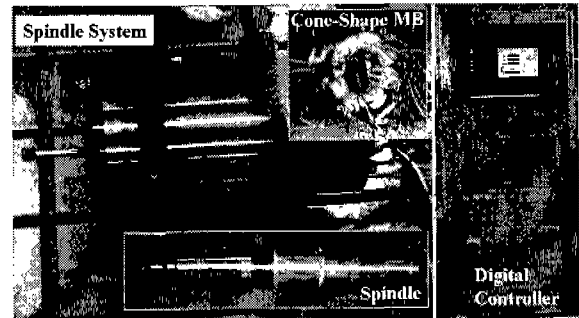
Manufactured cone-shape magnetic bearing spindle system
